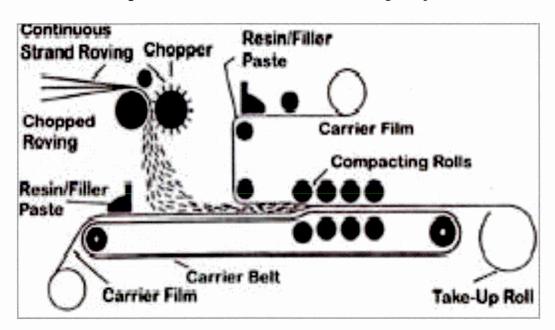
Sheet Moulding Compound Manufacturing Process (Frp Raw Materials 2013).
